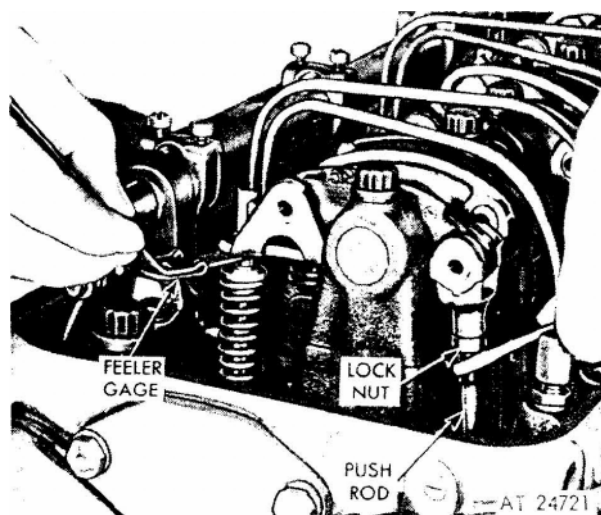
Adjusting valve clearance (four-valve cylinder head).
